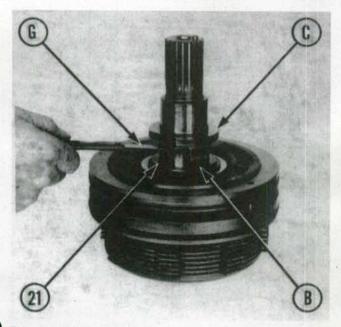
View showing transfer case clutch shimming measurement. Refer to text.
